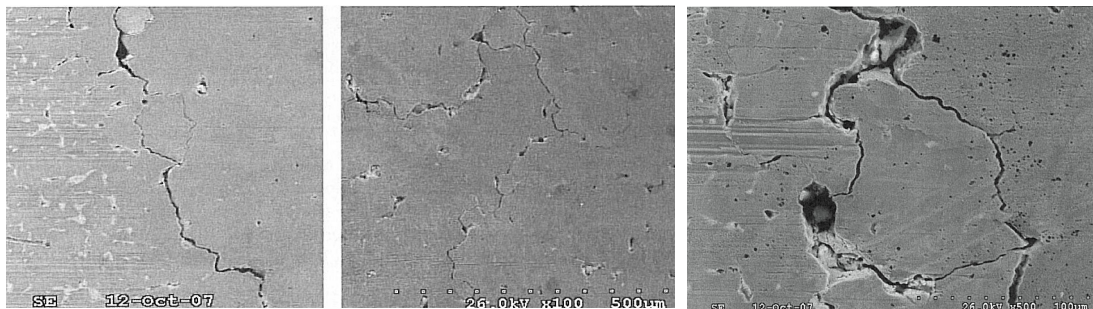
Scanning images of fatigue cracks in the sliding surface of the MB58 bush (zoom out of the part of Fig. 8) [9]
